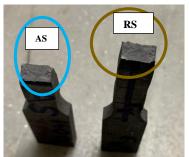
Fracture of MX-TRIVEX tensile specimen at 1400 rpm
